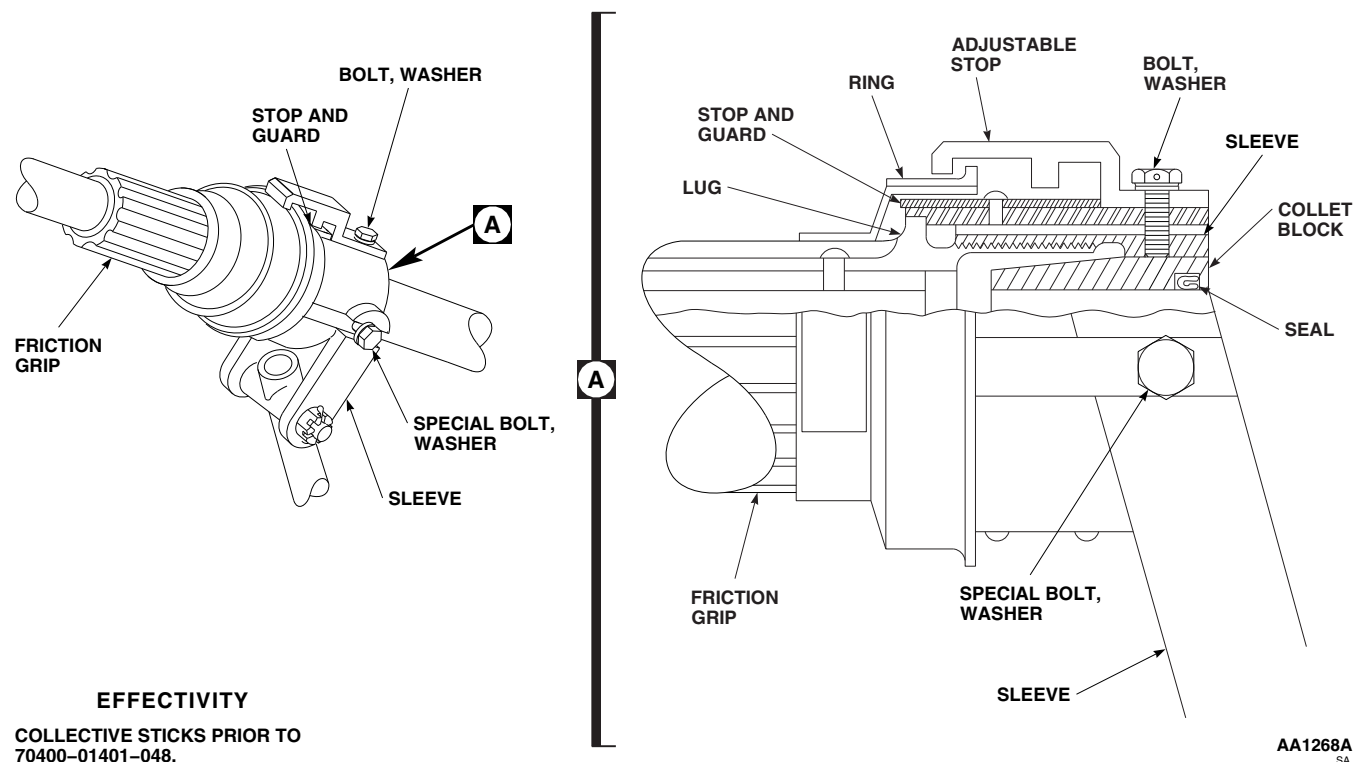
ADJUST PILOT'S COLLECTIVE STICK FRICTION LOCK
